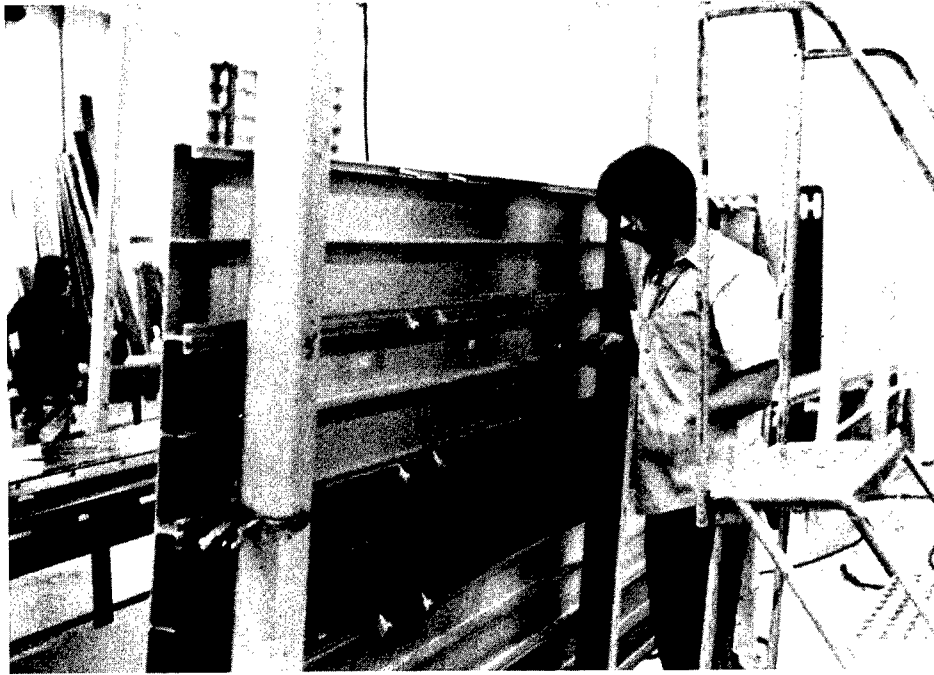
Extrusion panel easel to fabricate and disassemble signs.
